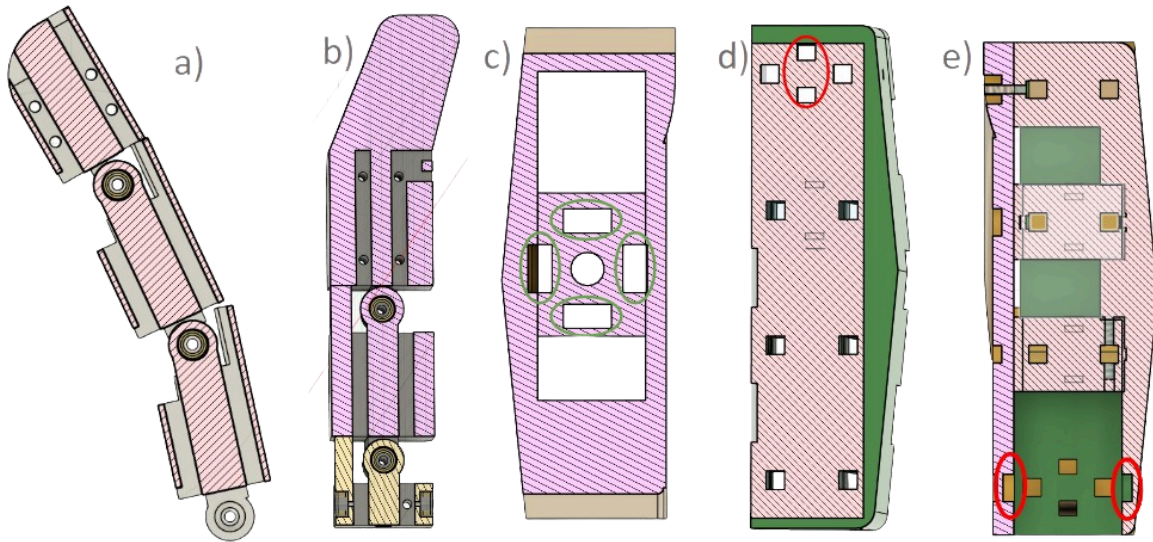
Section view of figures; a) Section view of fingers(except for the thumb) from left; b) Section view of thumb from right; c) Section view of palm from the bottom; d) Section view of Connection module of finger to palm from the palm side; e) Section view of Connection module of finger to palm from the fingers side.
